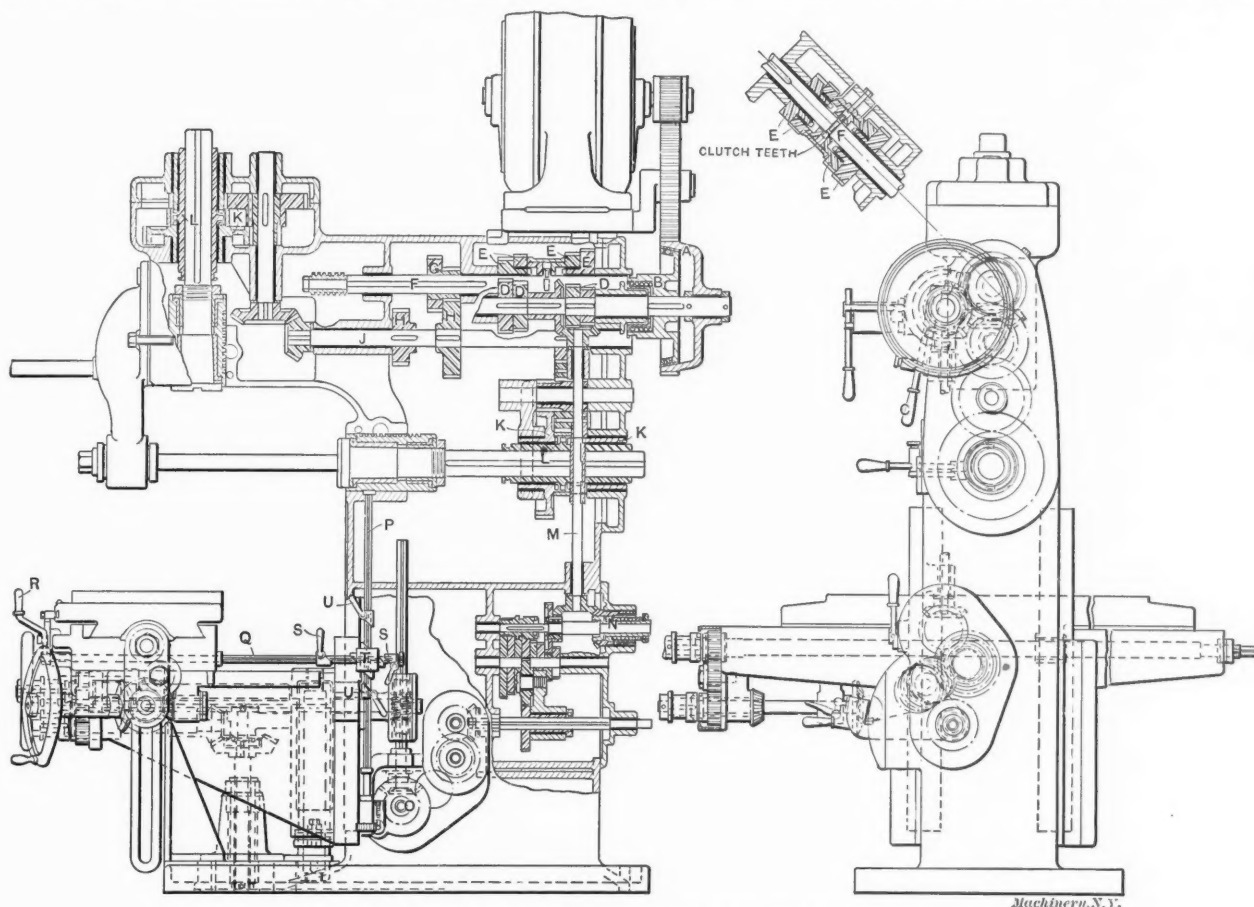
The Feed and Drive Mechanism of the No. 5 Machine
